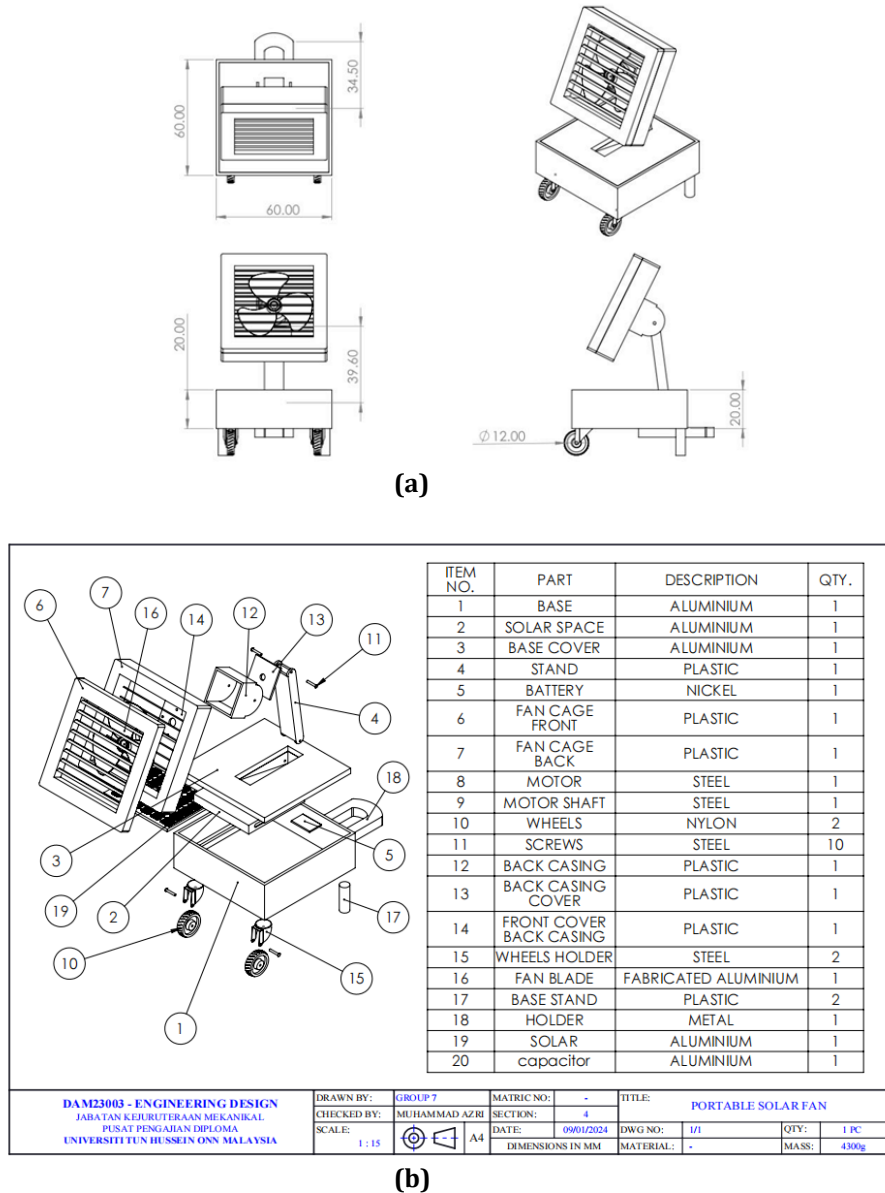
Portable Solar Fan Drawings (a) Orthographic; (b) BOM (Bill of Materials)
